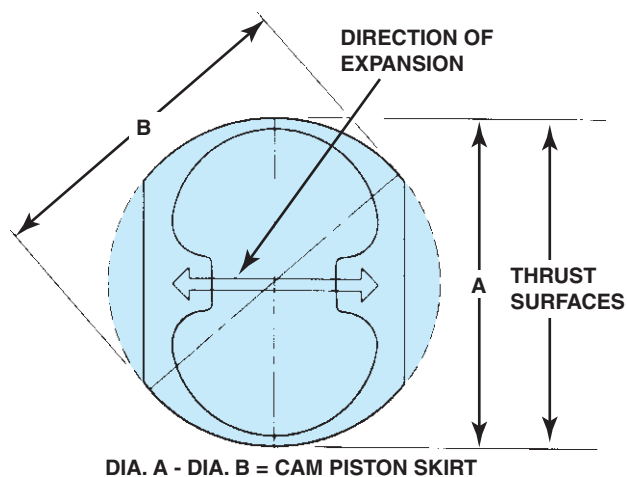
Piston cam shape. The largest diameter is across the thrust surfaces and perpendicular to the piston pin (lettered A).
